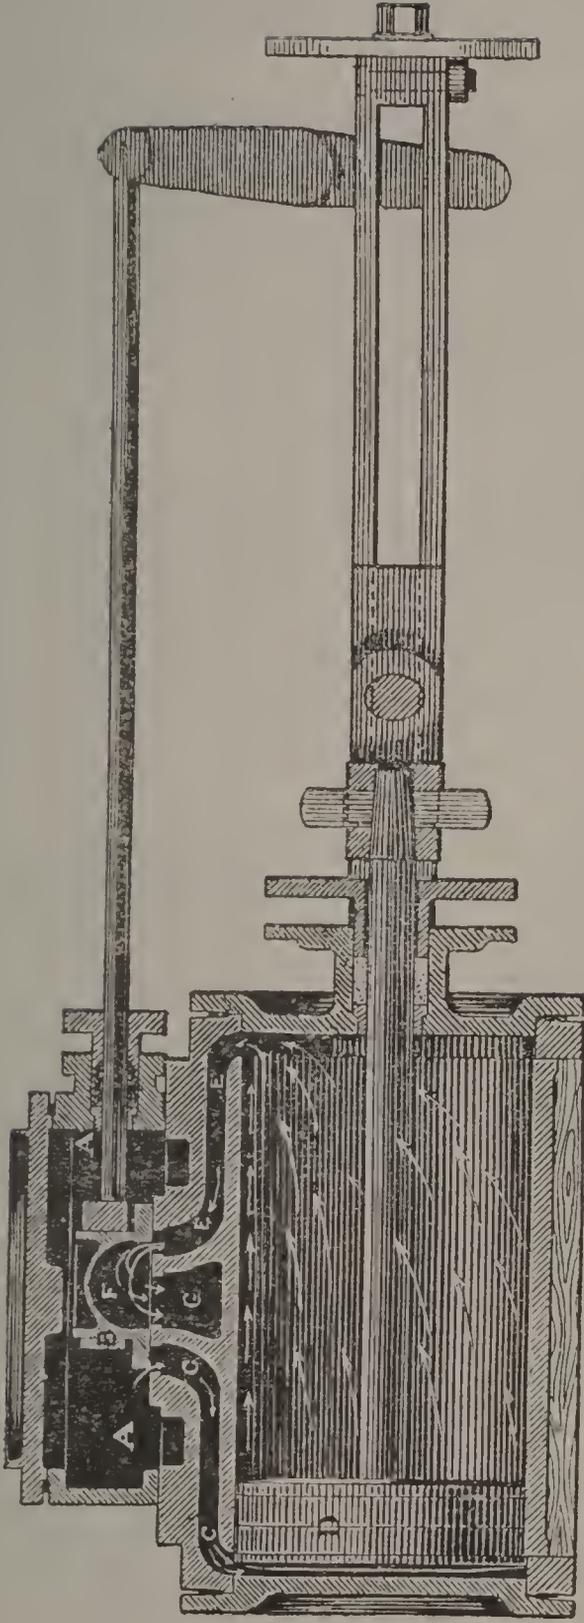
SECTIONAL VIEW THROUGH STEAM CHEST AND CYLINDER.
